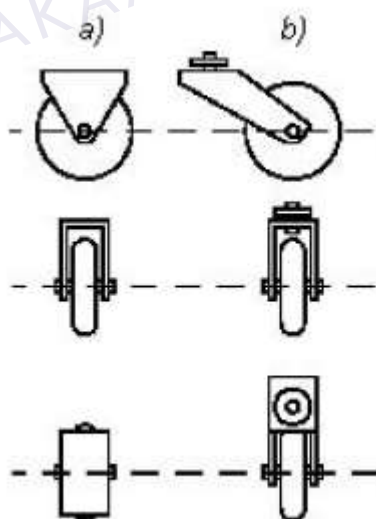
Two basic wheel (a) standard wheel (b) caster wheel [6]
